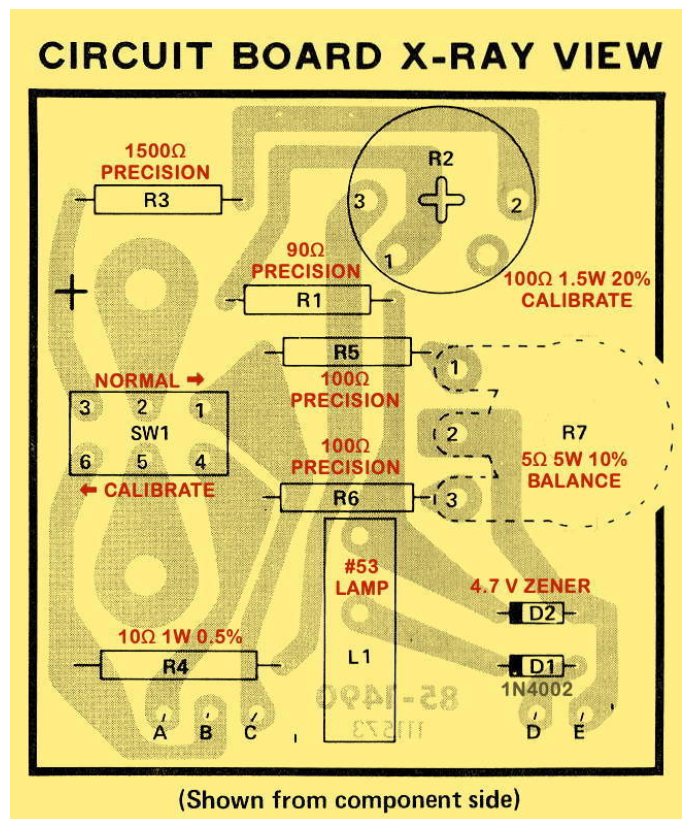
Author enhanced circuit board drawing from the manual. R7 (dashed) mounts on the foil side of the board. Large unused holes above and below SW1 fit the meter terminals. Plus is marked.
